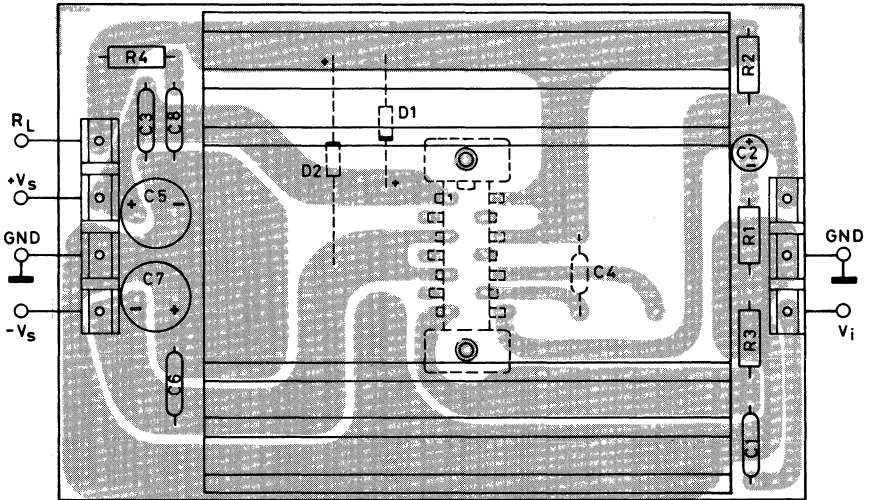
P.C. board and component layout for the circuit of fig. 16 (1:1 scale)
